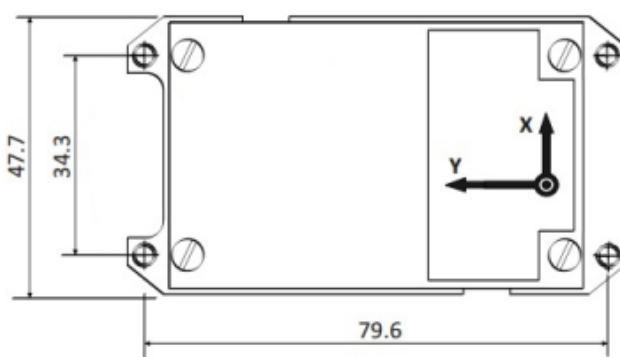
to Fig. 4.3 shows the outline drawings of the housed Inertial Labs™ INS and INS-OEM units. All dimensions are in millimetres.
